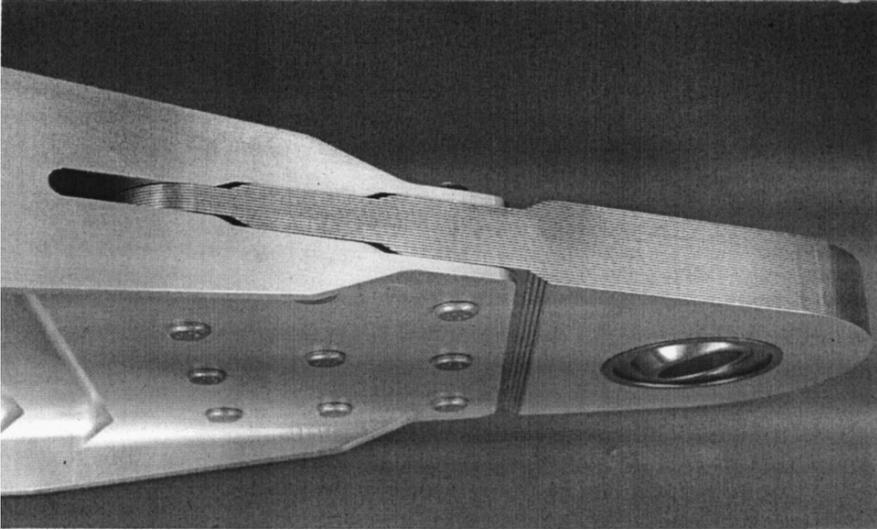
A lug of an aircraft wing-fuselage attachment made of Glare 1 [16]. Lug thickness 19.0 mm (0.75 inch), hole diameter 44.45 mm (1.75 inch).
